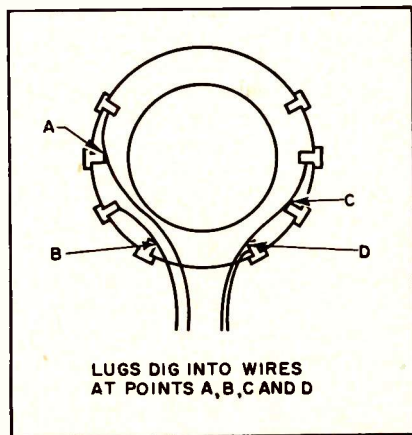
Sketch of yoke terminal lugs (cover removed) indicating how wires can short.
